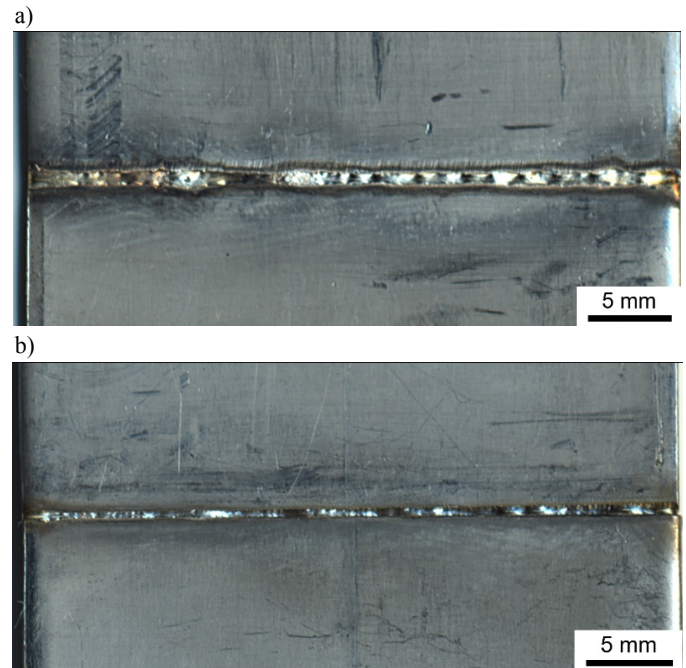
A view of the butt joint of 2.0 mm sheet of AISI 304 stainless steel laser welded by the disk laser at output power 1.5 kW, welding speed 4.0 m/min, and focal spot position -1.0 mm (Table 3); a) weld face, b) root surface
